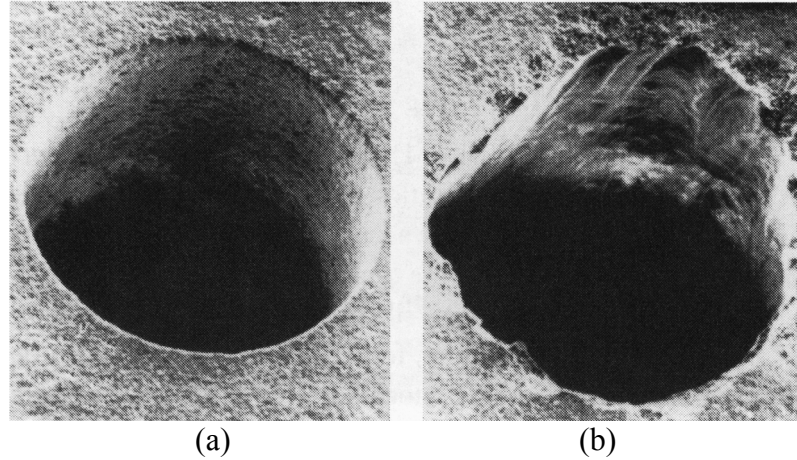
SEM images of 640 μm -diameter holes drilled into alumina with: (a) ultrasonic machining; (b) laser-beam machining [Mor92].
